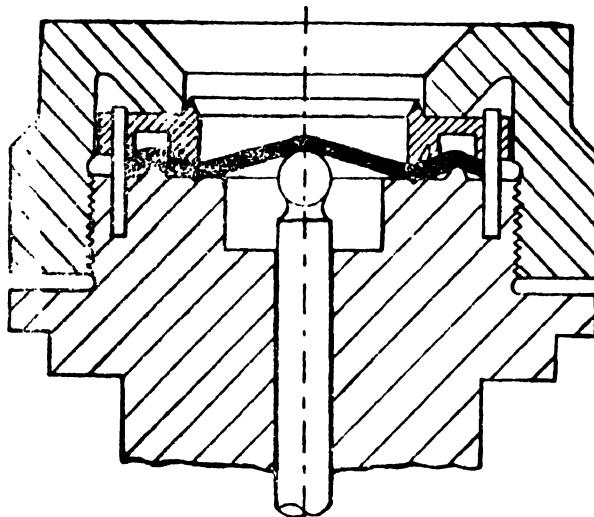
CROSS SECTION OF CLAMPING HEAD WITH TEST PIECE IN POSITION
